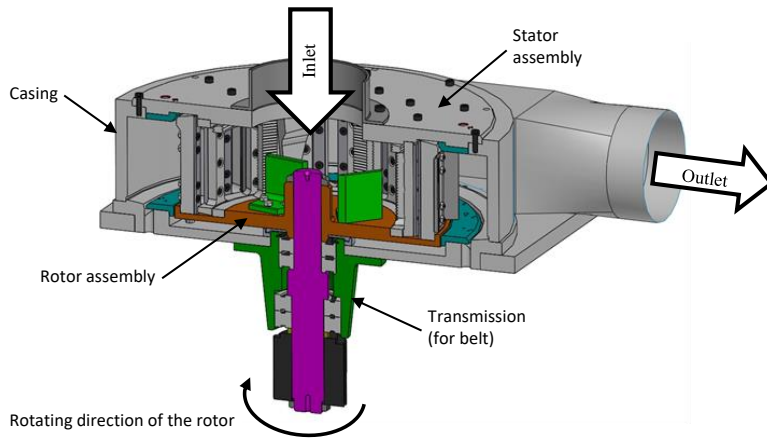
Main parts of the centrifugal grinder prototype. Lateral section view.
